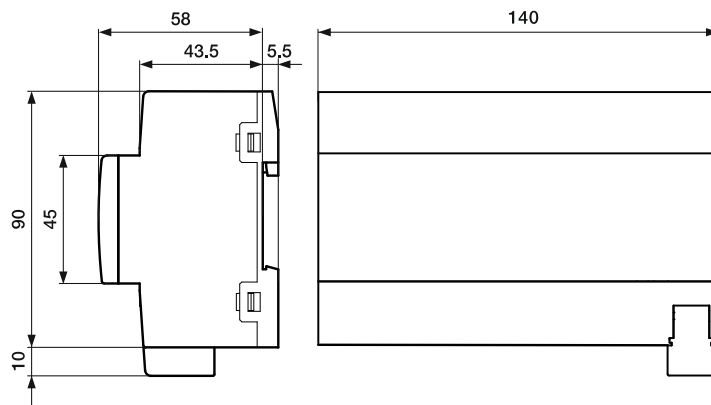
Dimensions of 8-fold switch actuator MDRC (specifications in mm)
